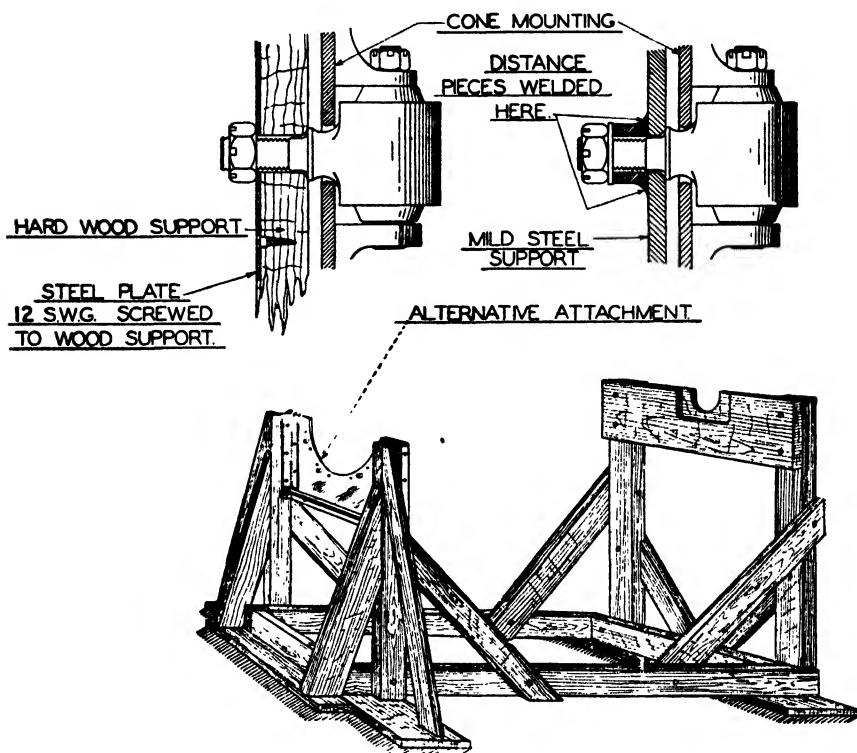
Special Stand for Fitting Flexible Mounting.
